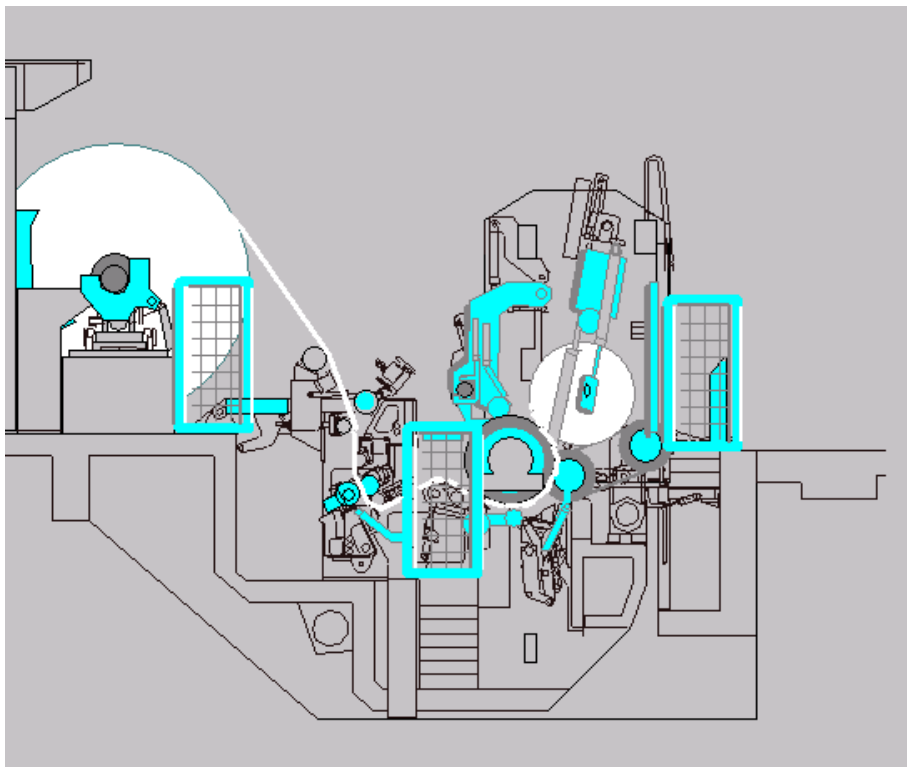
The main parts of the paper winder: the unwind section (left), the slitting section (middle) and the winding section (right). The drawing courtesy of Metso Paper.
